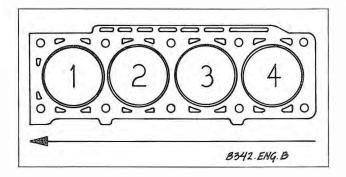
Piston numbering sequence. Arrow points to front (radiator end) of engine.
